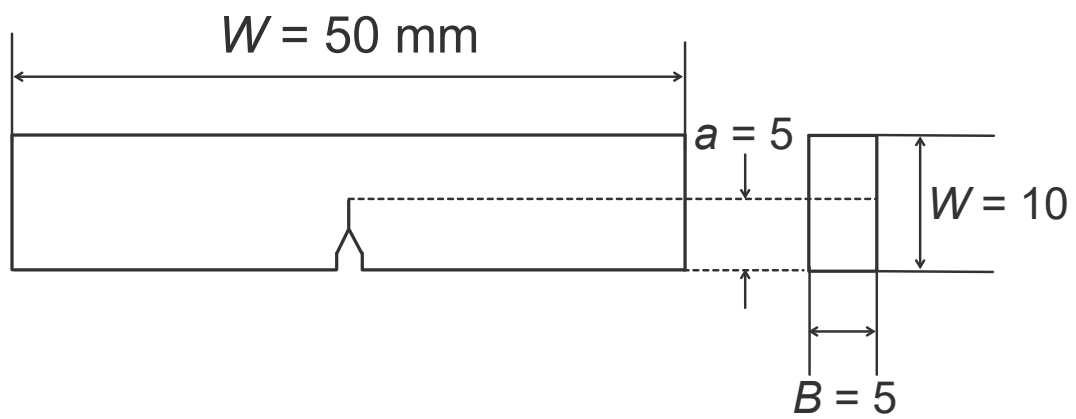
Dimension of a test piece for 3-point bending test.
